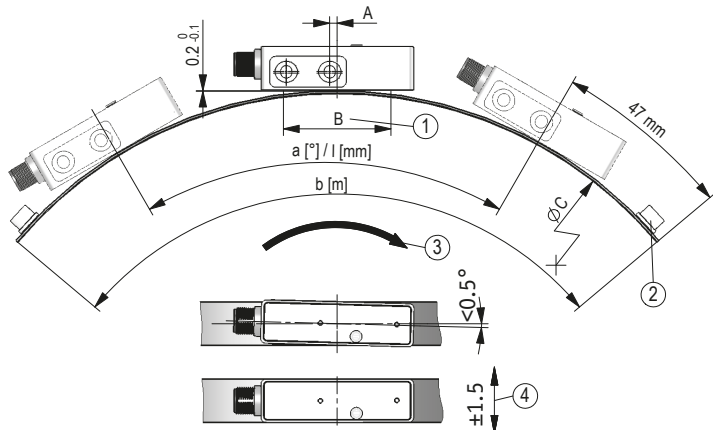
Mounting tolerances with MBAC501 (Dimensions: see the table below)
